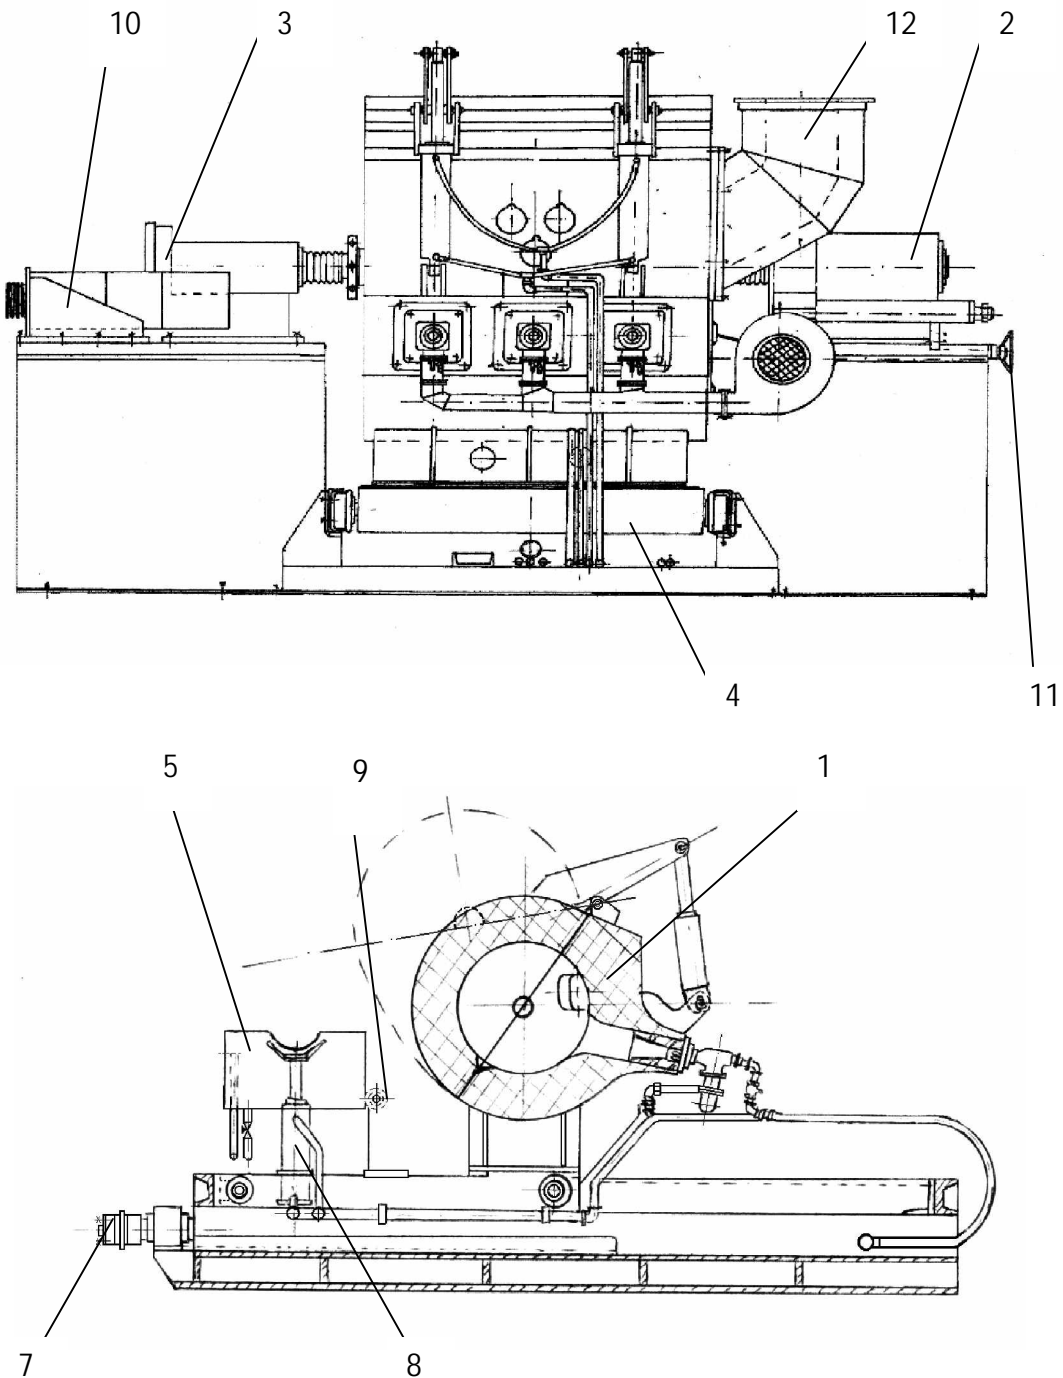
Installation for centrifugal casting of bimetallic jacks: 1. Heating furnace; 2. Shifting head; 3. Headstock; 4. Heave carriage; 5. Cooling basin; 6. Cardan coupling; 7. Heave attachment; 8. Hydraulic cylinder; 9. Independent time control device; 10. Booster; 11. Disalignment device; 12. Ventilation system.
